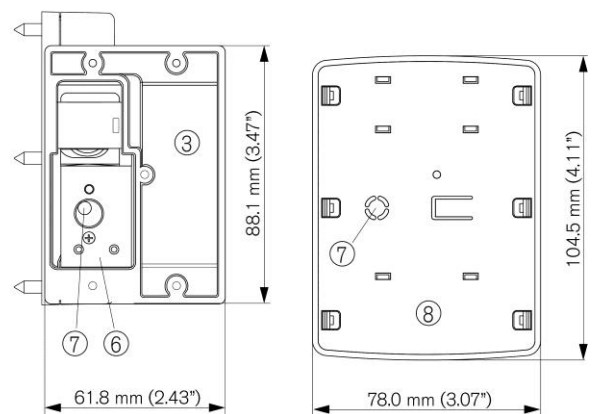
Dimensions of the GAT NET.Lock 7000 with GAT NET.Lock BoltSet 7200 for metallic doors
